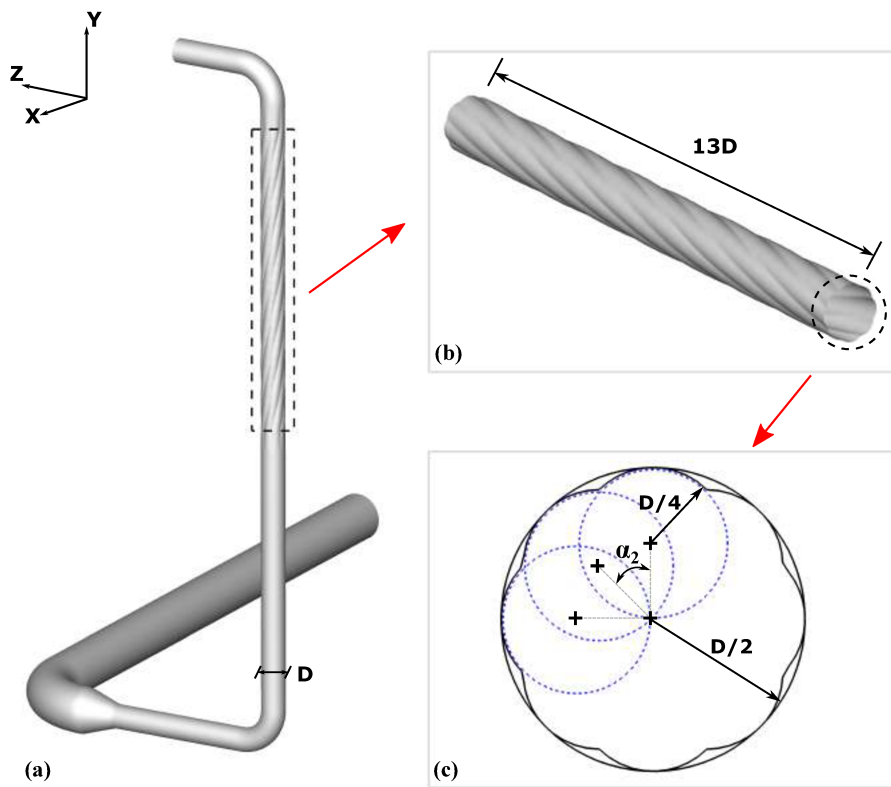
Schematics of the proposed pipe wall with 8 undulations.
